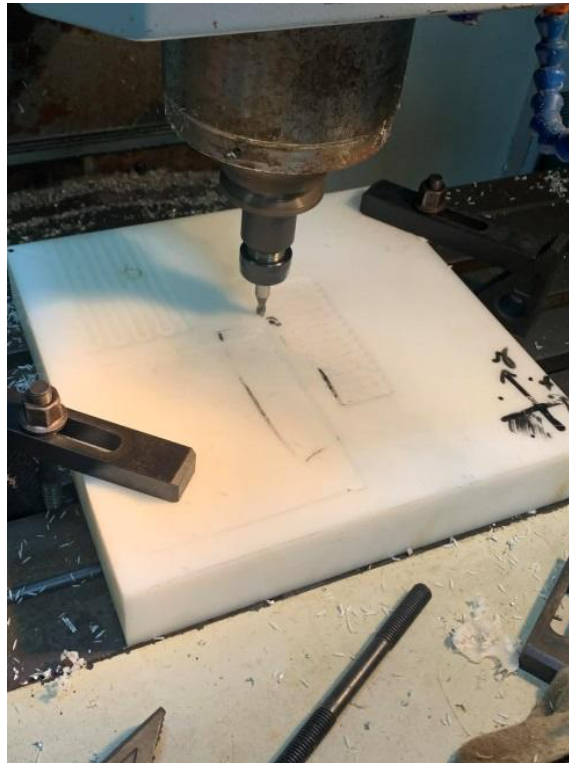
Experimental setup for pocket milling on a polymer workpiece using a CNC milling machine.
